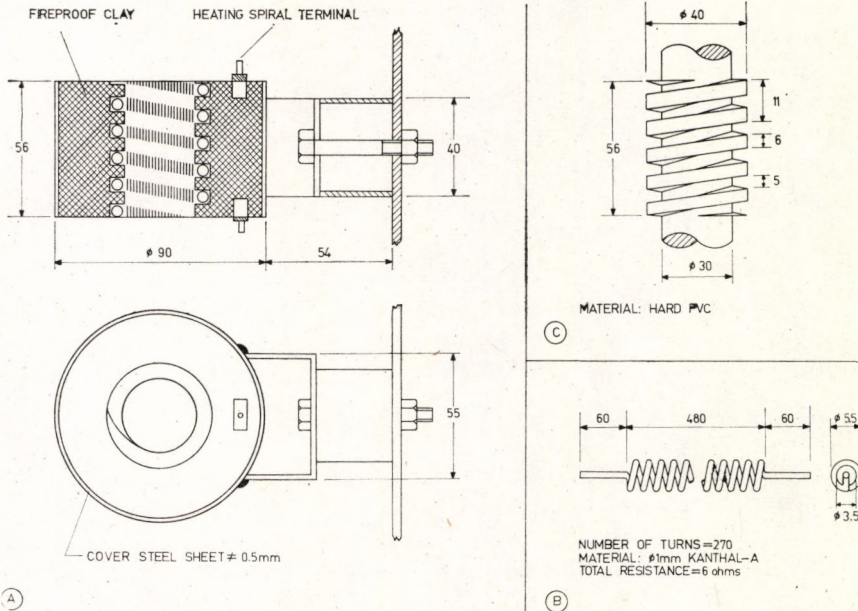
Oven layout. a) Dimensional outlines of oven, b) heating spiral dimensions, c) forming tool for oven
